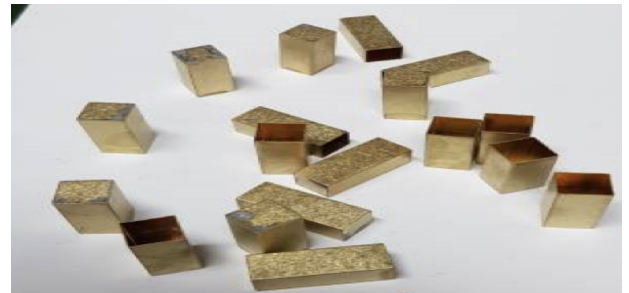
Brass Case used as Outer Shape of Sensor Mechanism.
